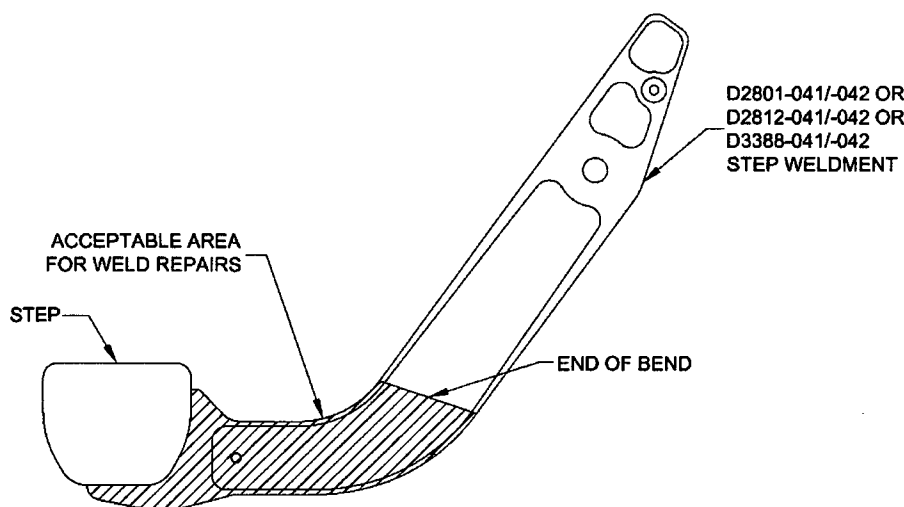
Acceptable Area for Weld Repairs
